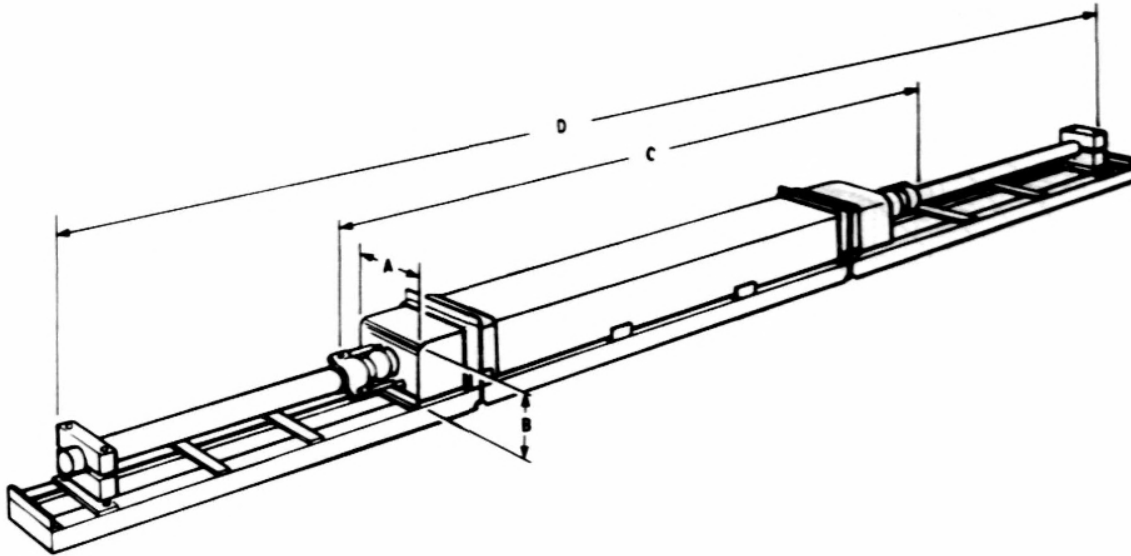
TUNNEL TYPE LOADING COIL CASE
